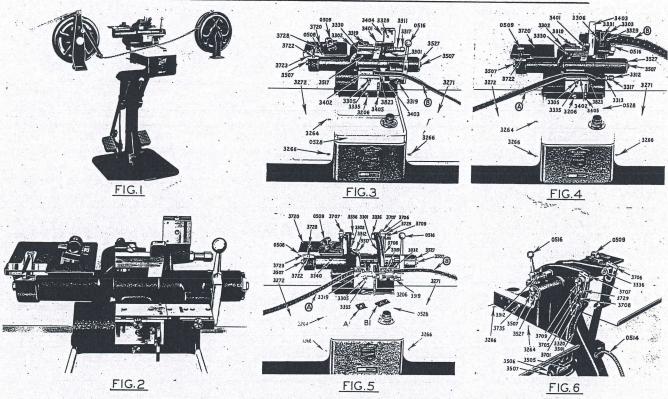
FIG. I - THE BELL & HOWELL STANDARD FILM SPLICING MACHINE WITH REWINDS.
